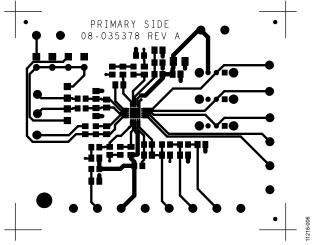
AD8232-EVALZ Evaluation Board Primary Side Copper
